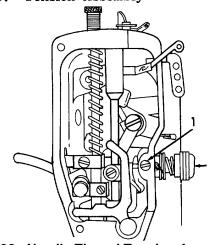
Needle Thread Tension Assembly, Removal. GO TO NEXT PAGE
